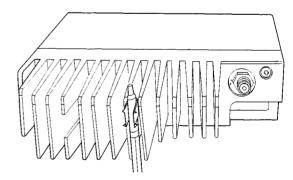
Insert thermal Switch into R1225 Heatsink
